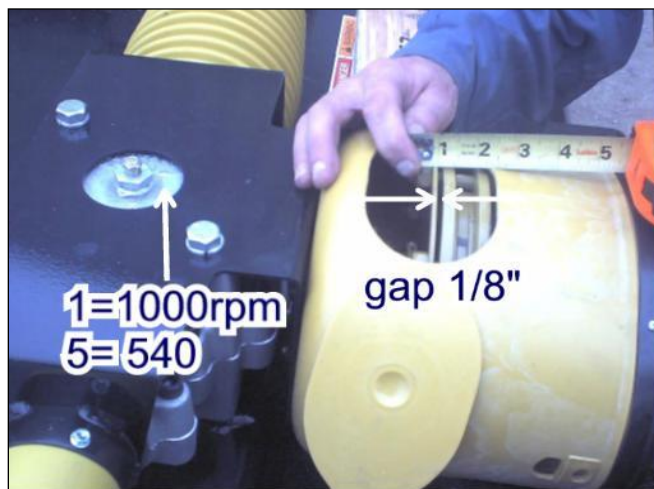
CLUTCH SPRING TENSION /GEARBOX RPM
